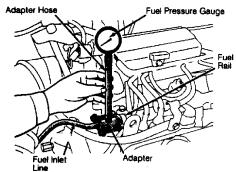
Installing Fuel Pressure Tester (Typical) Courtesy of Mitsubishi Motor Sales of America.
